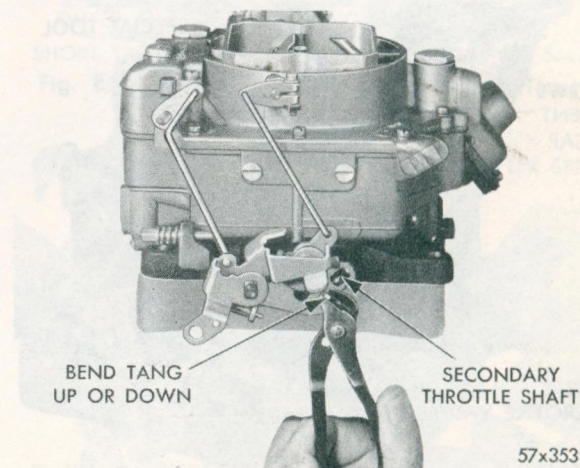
Bending Throttle Shaft Tang to Obtain Clearance
